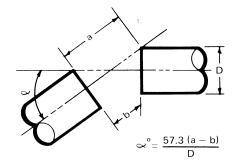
To determine relative angular shaft-positions of driving and driven machines, measure at four points the space between the shaft ends. Choose the largest (a) and smallest dimension (b).
